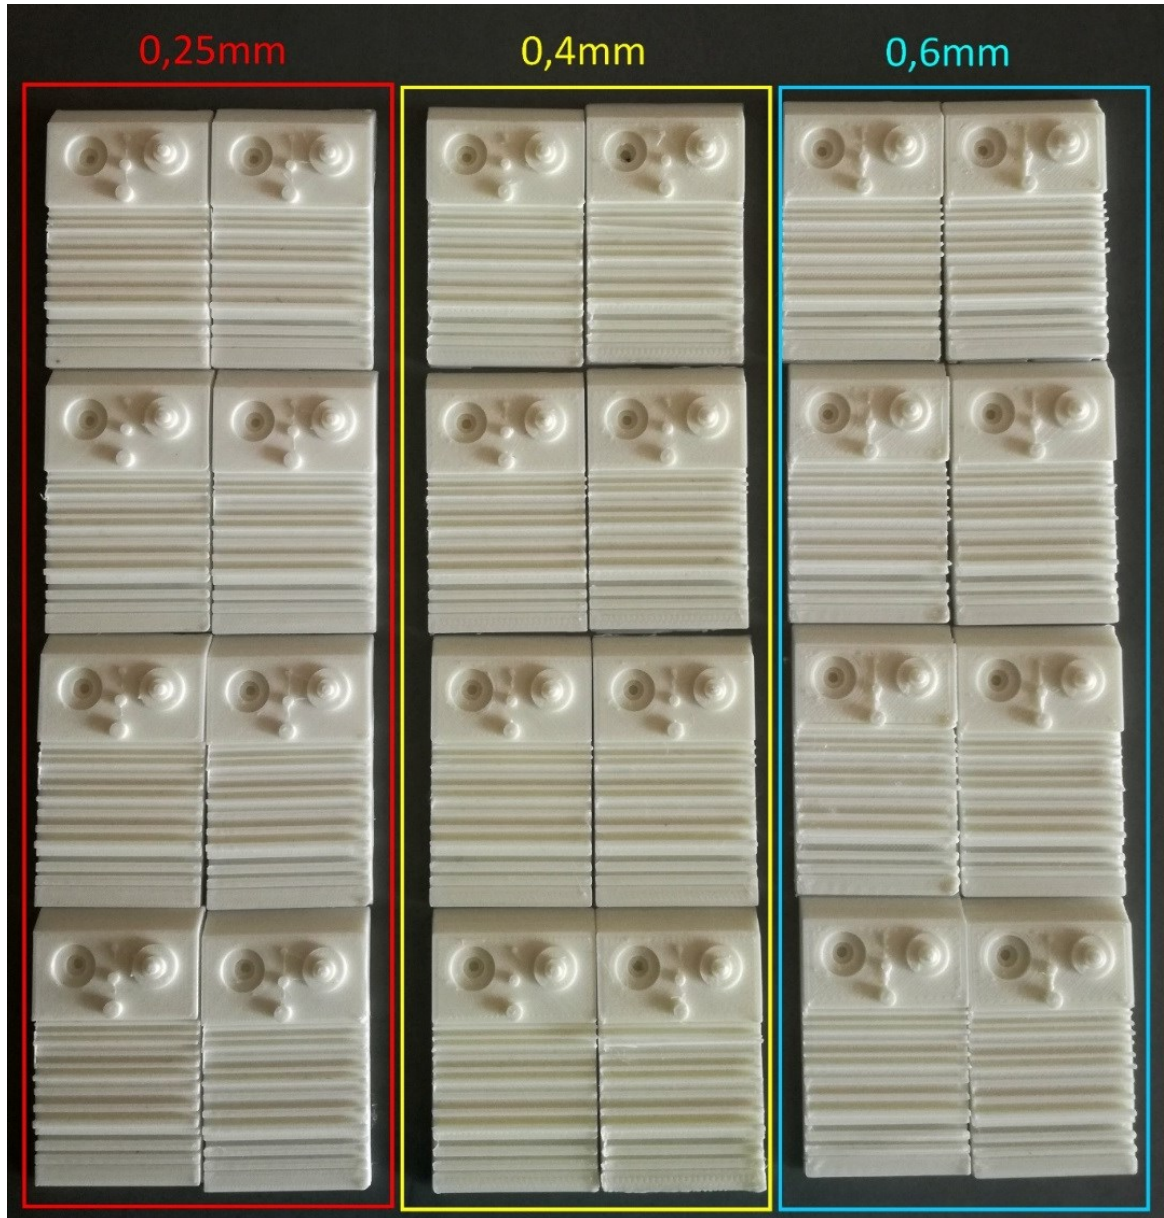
Actual 3D test parts printed with 0,25mm, 0,4mm, 0,6mm nozzle diameter
